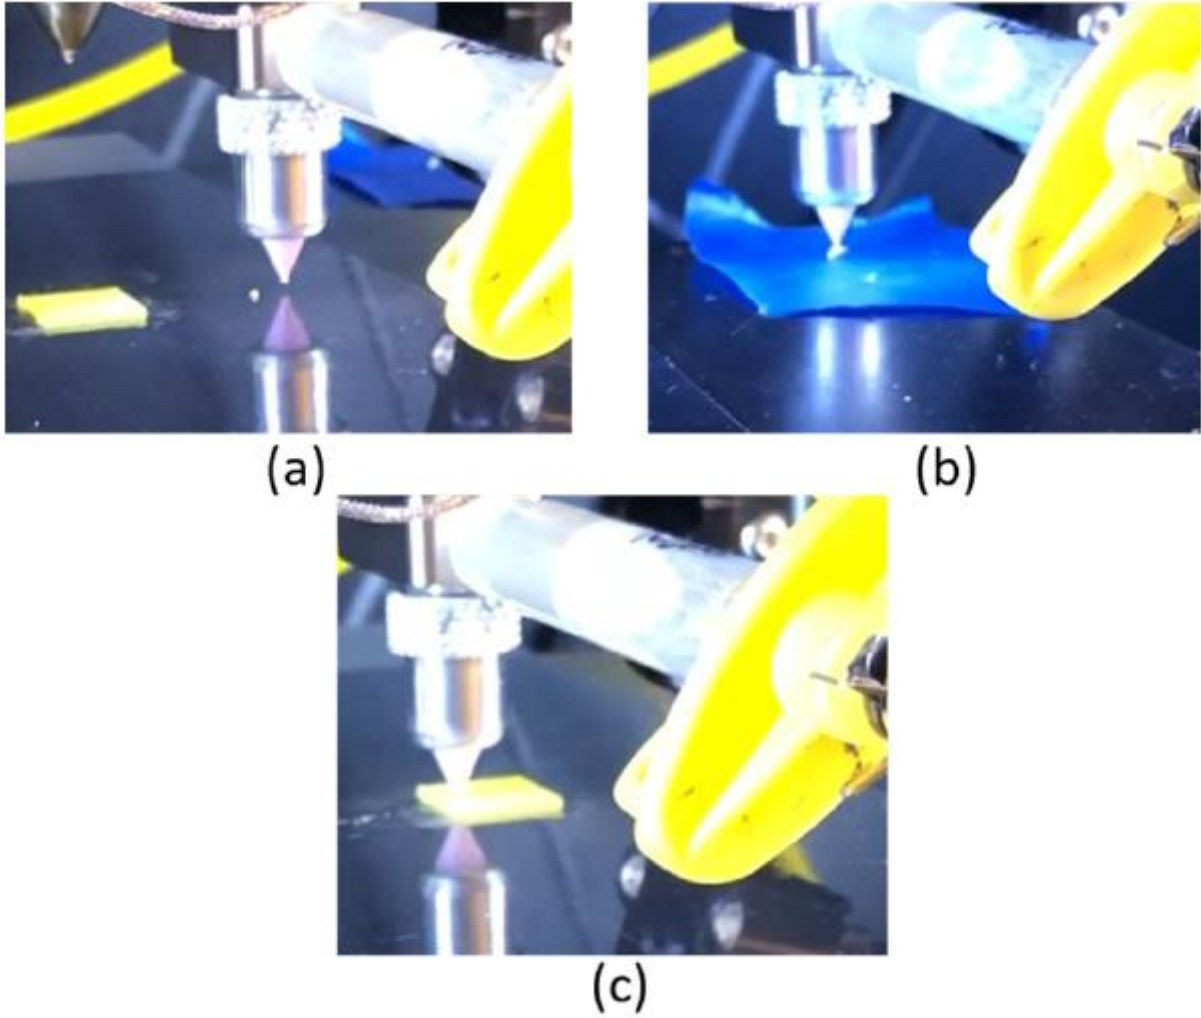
SmartPump™ priming process. (a) SmartPump™ tool change, (b) SmartPump™ dispensing on the side of the bed, and (c) SmartPump™ moving back to the print.
